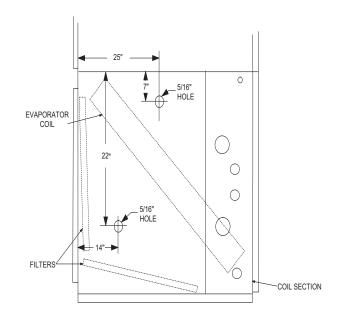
HOLE LOCATION FOR PRESSURE DROP READING
